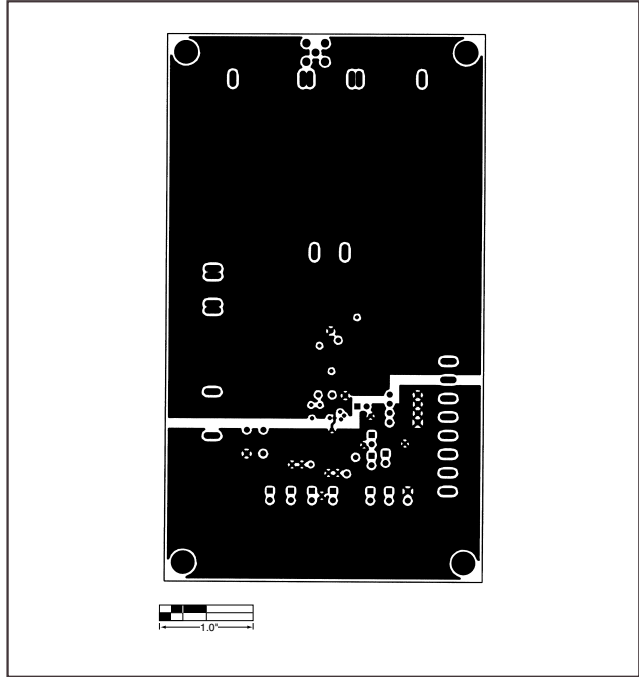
PC Board Layout—Internal GND Plane Layer 2
